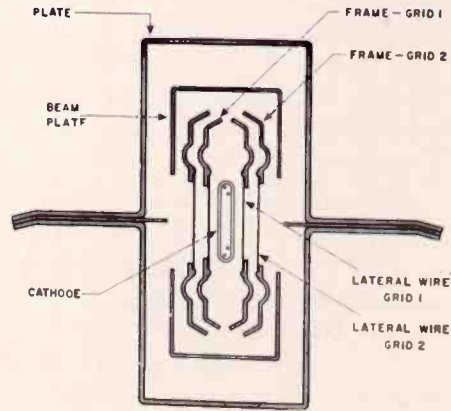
Cross-sectional view of a complete tube mount employing frame grids.
